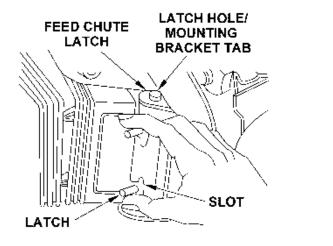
HE Feed Chute Latches and Latch Holes/Mounting Bracket Tab Inspections.
